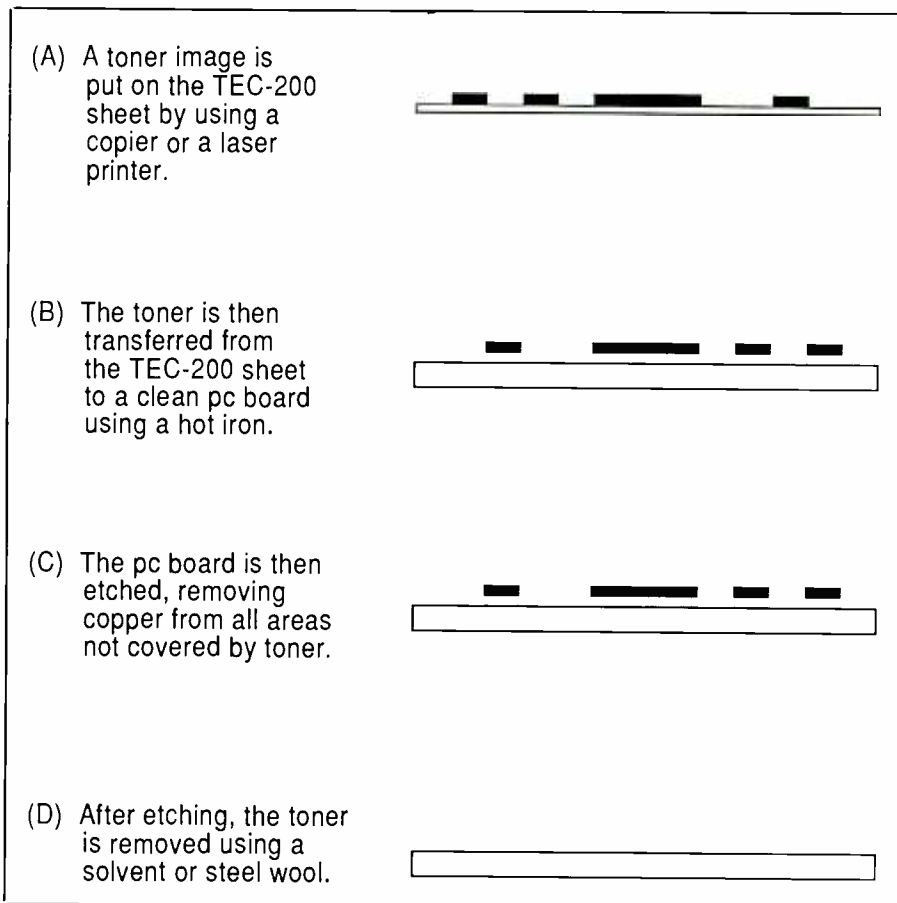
How TEC-200 sheets simplify hacker fabrication of pc boards.
